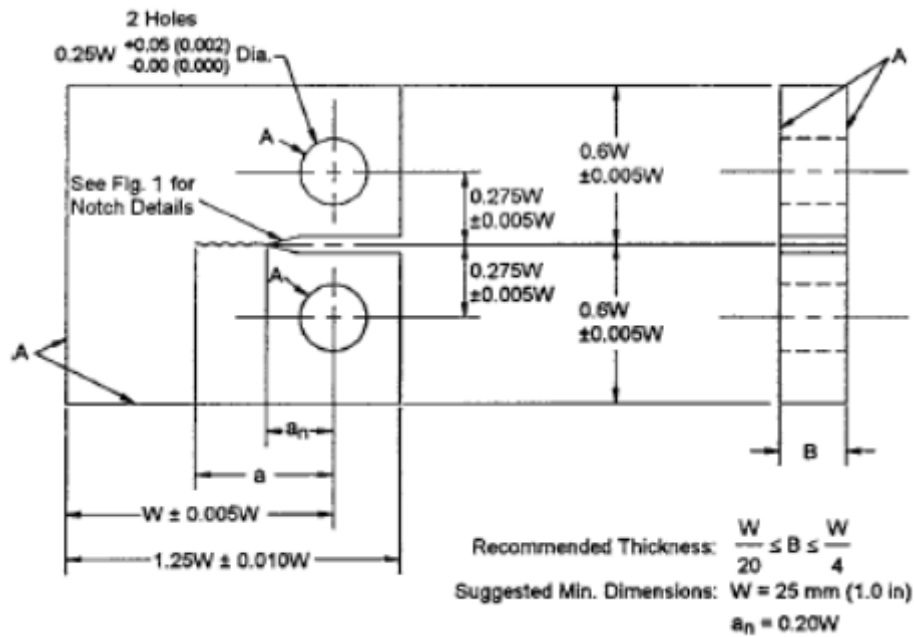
Dimensions requirements in ASTM E647 [45]
